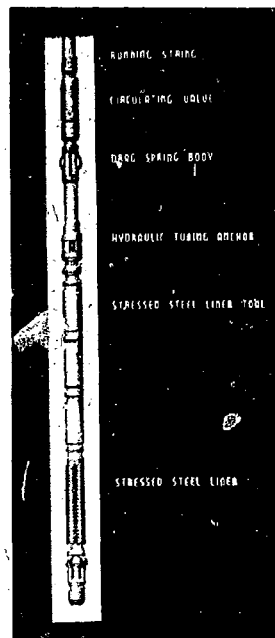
Assembled Tool String Required for Installation of Stressed Steel Liner
